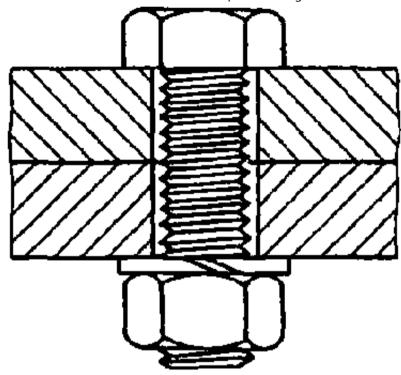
Joint made with a bolt and a nut, locked with a spring ring Sequence of operations:
